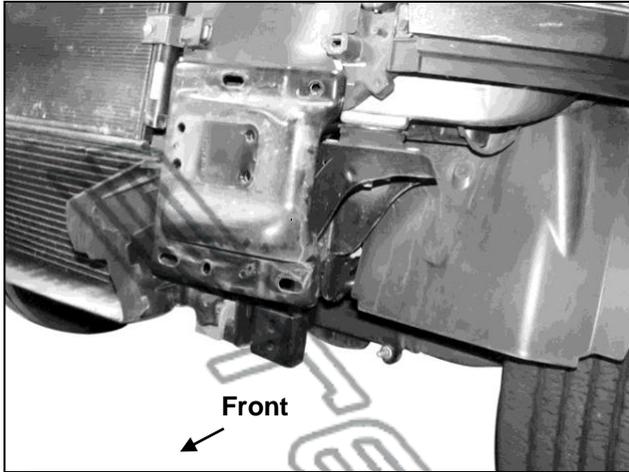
Remove hex nuts from bumper bolts (arrows). Bumper bracket pictured from below/behind bumper
